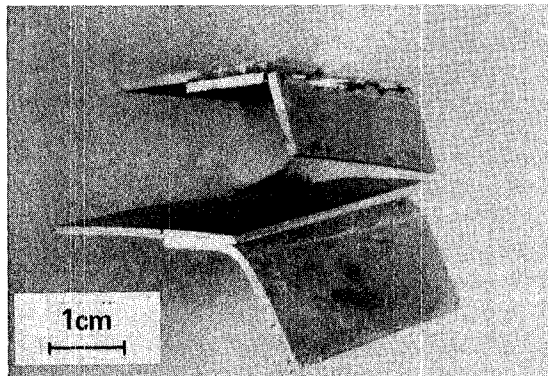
Typical Brazed Joints Using METGLAS BNi1A
